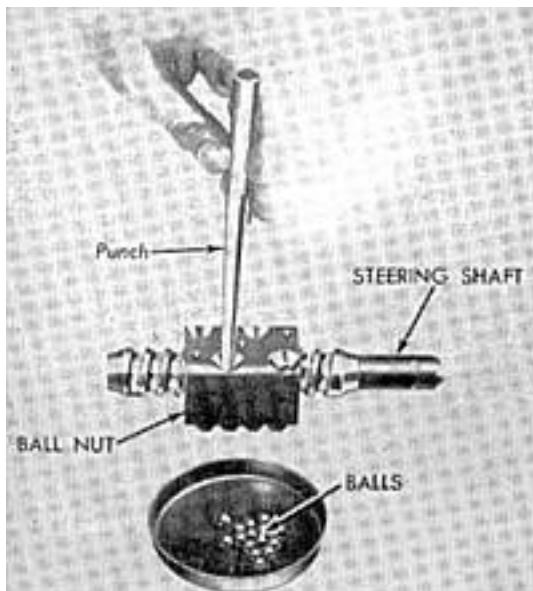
It is possible to disassemble the screw shaft and ball nut assembly used in model 8N tractors but such procedure is not recommended. Refer to text.
